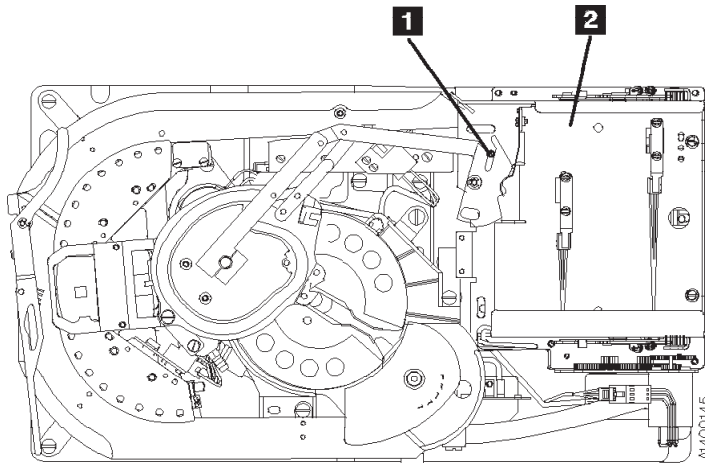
Example of Leader Block and Threader Pin at Cartridge Loader Assembly
